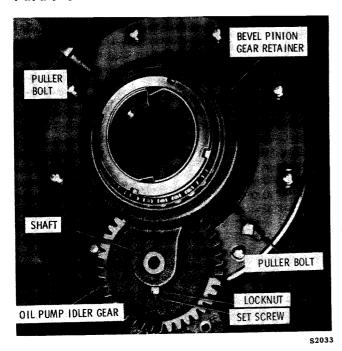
Removing bevel pinion gear bearing retainer (VH, VSI series)
